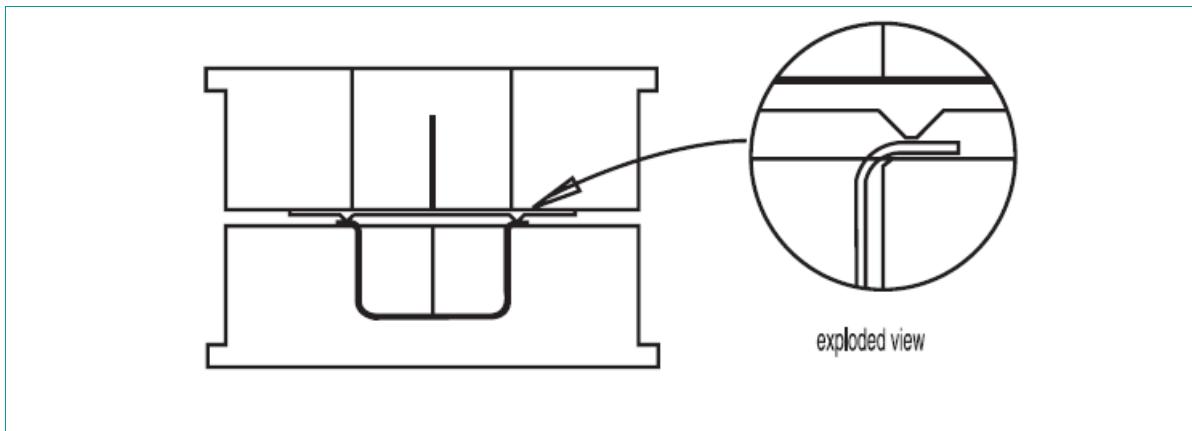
One Shot Welding Electrode/Package Cross Section
